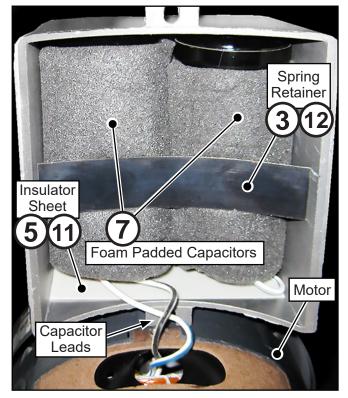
Baldor Motor Capacitors (NOTE: Disassembly angle shows enclosure upside-down)
